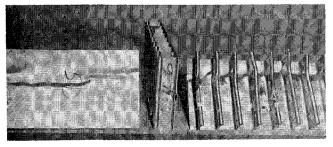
Tested titanium integrally formed bulb (spot welded) panels.
